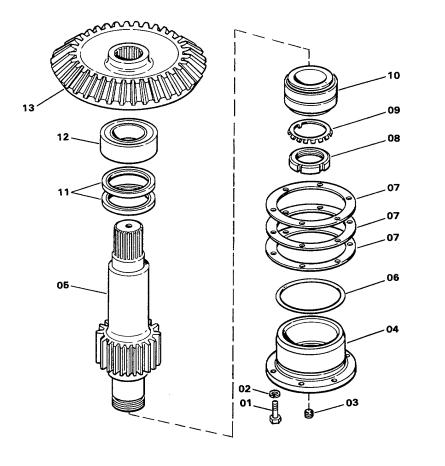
C-1. Intermediate Swing Shaft (910N483-1)
